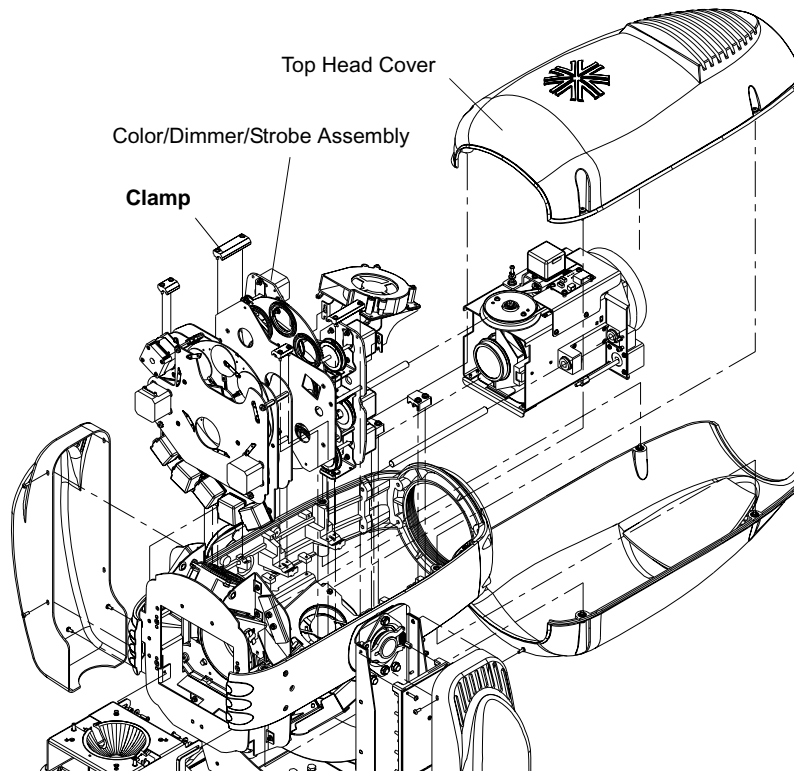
VL3000 Color/Dimmer/Strobe Assembly Replacement
